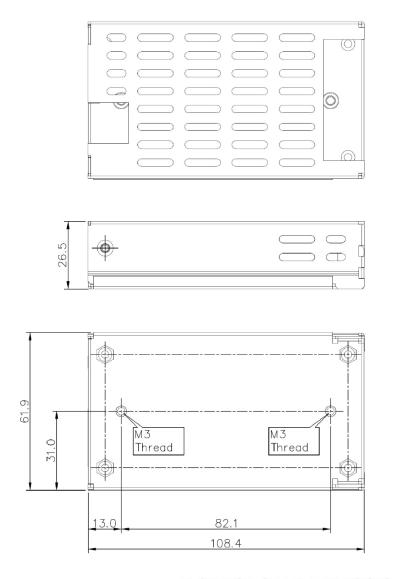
Mechanical Drawing - Option 2 (Output Connector - Header Molex)
